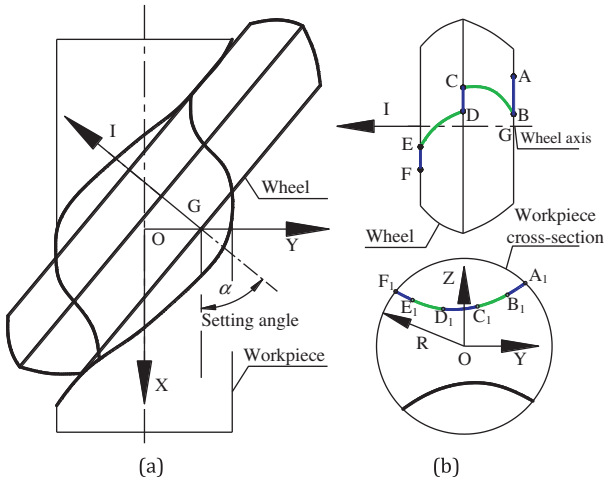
Illustration of machine setting and contact line between wheel surface and machined workpiece.
